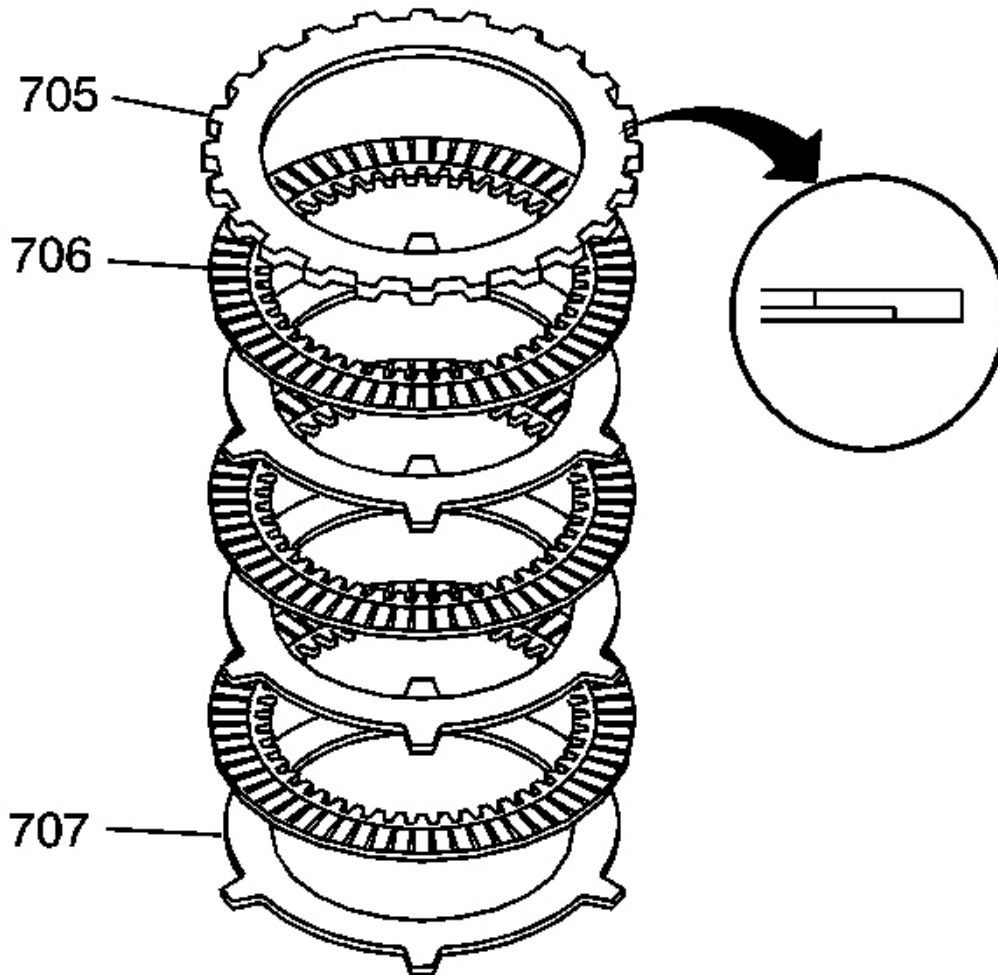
Installing The 1st & Coast Clutch Housing & Components
